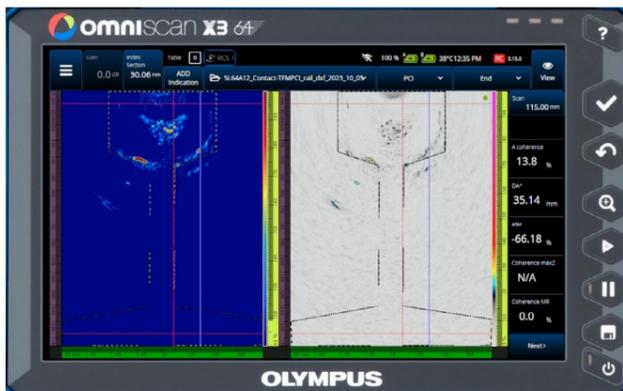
OmniScan X3 64 flaw detector using TFM and PCI on a 160 mm rail displaying cluster porosity in an aluminothermic weld.
